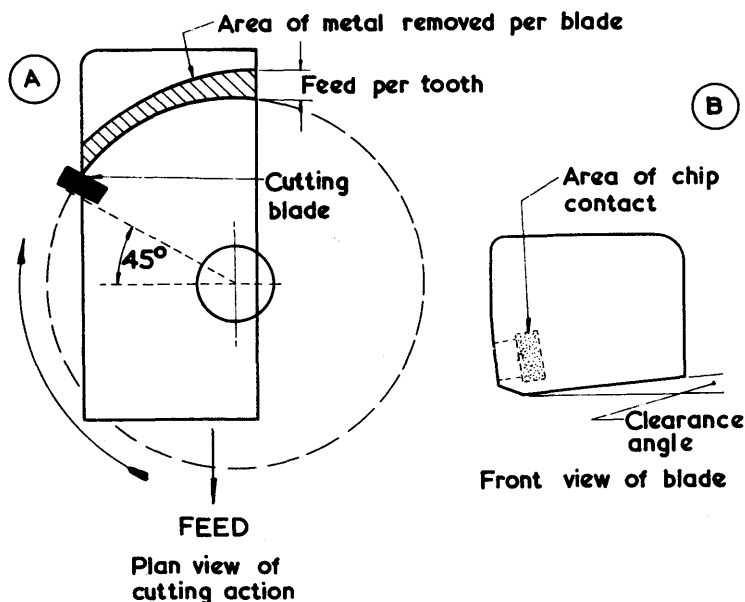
Cutting Action of Negative-rake Milling Cutter.
